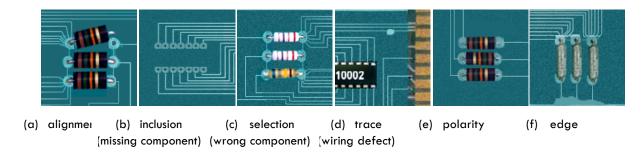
PRINTED CIRCUIT BOARD DEFECTS
